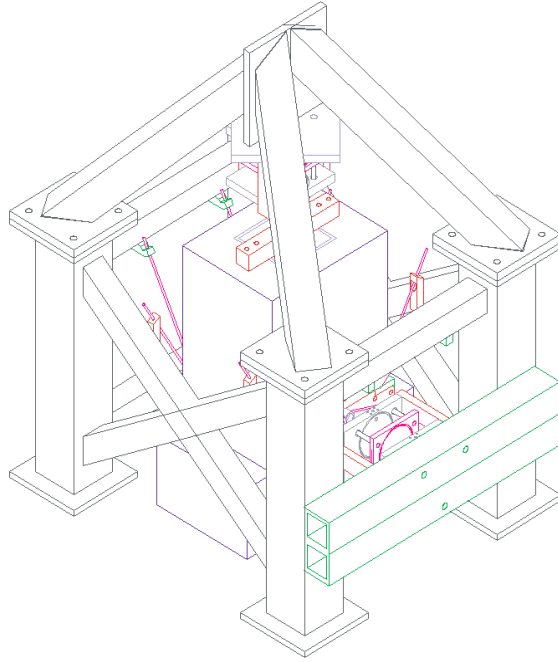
Design for the hydraulic actuator test fixture. The blue block in the center is the 300kg test mass, which is supported by eight large off-load springs (in magenta). The steel frame (gray) holds the off-load springs and two hydraulic actuators, one on the side and one on the top. The seismometers are imbedded in special holders within the blue test mass.
